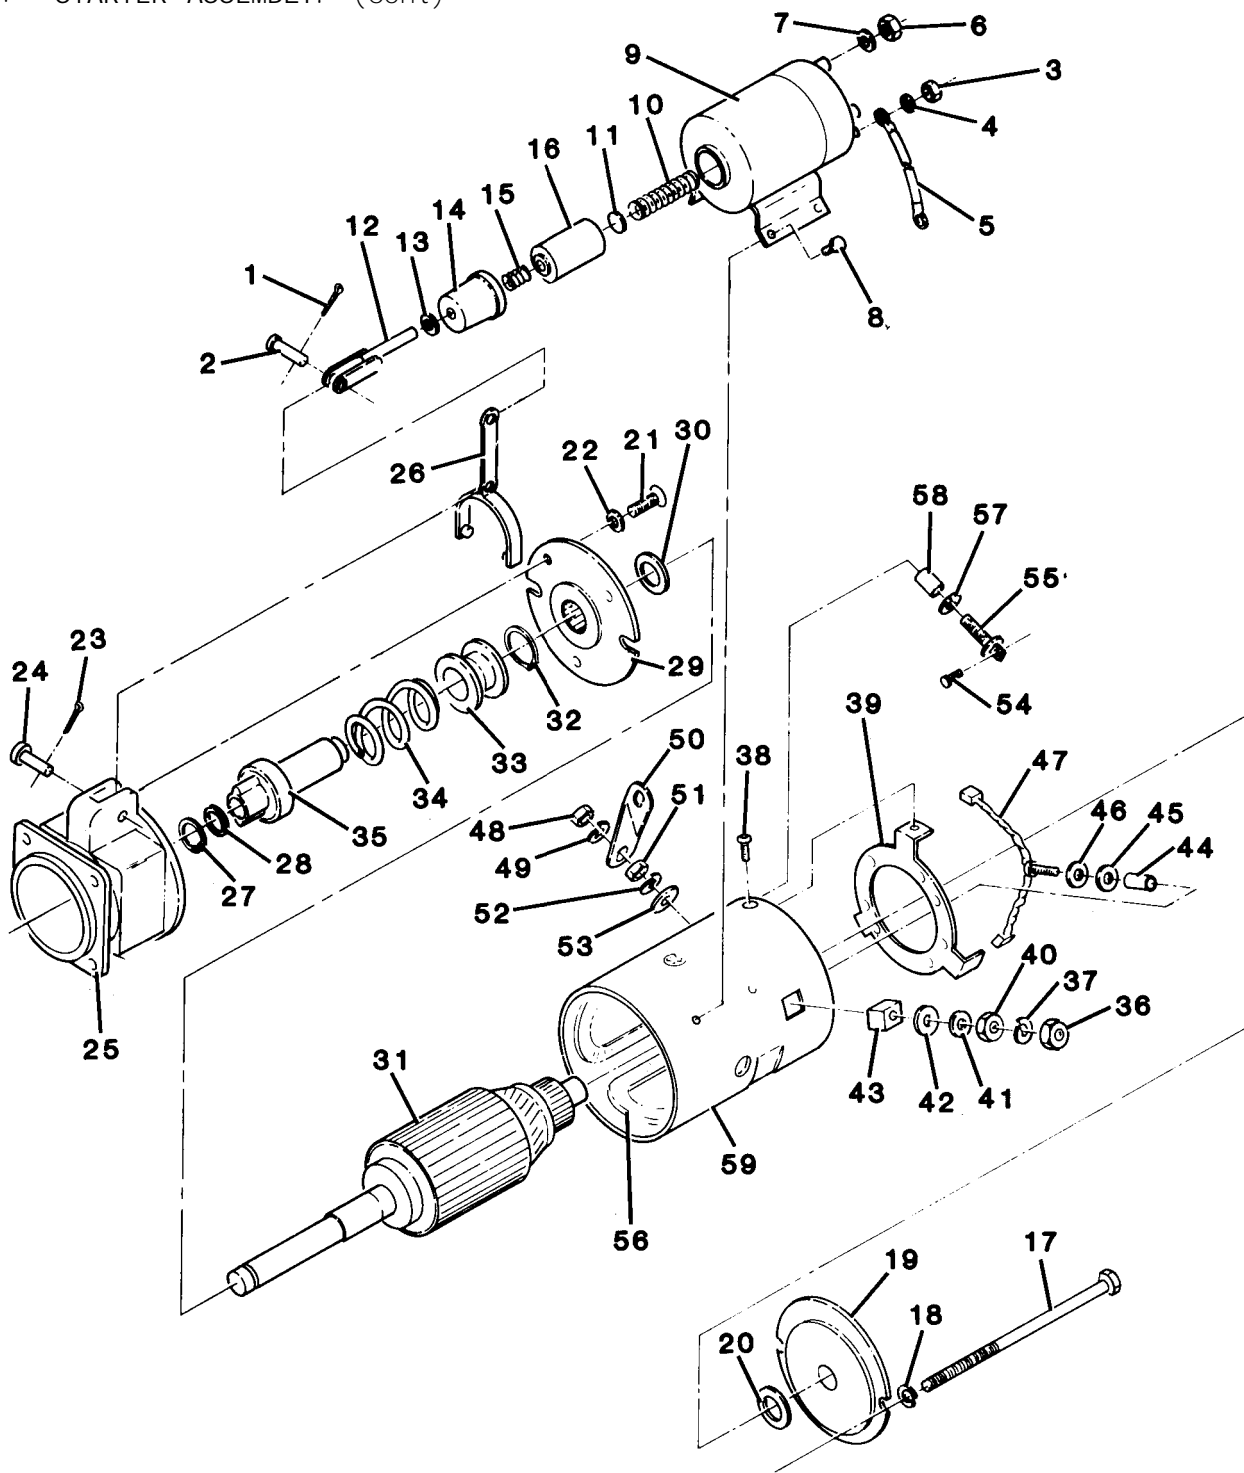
Starter Disassembly (Sheet 1 of 2)
